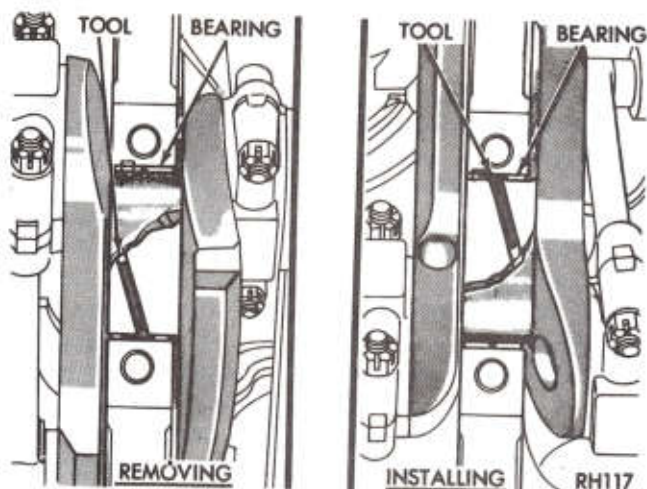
Removing and Installing Upper Main Bearing with Tool C-3059
